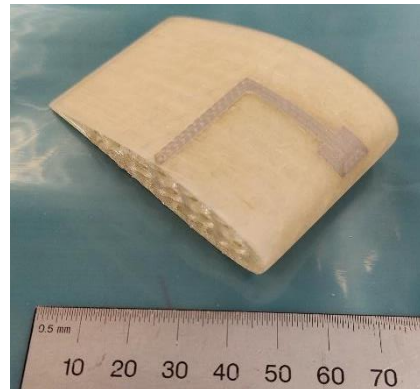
Conformal DIW of Dupont CB-028 onto airfoil tool via 6-axis robotic arm.
